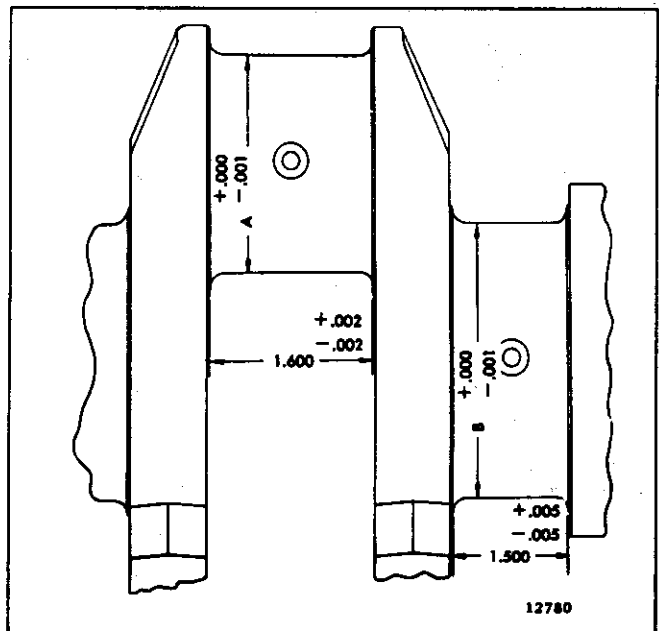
Dimensions of Crankshaft Journals - In-Line Engine
